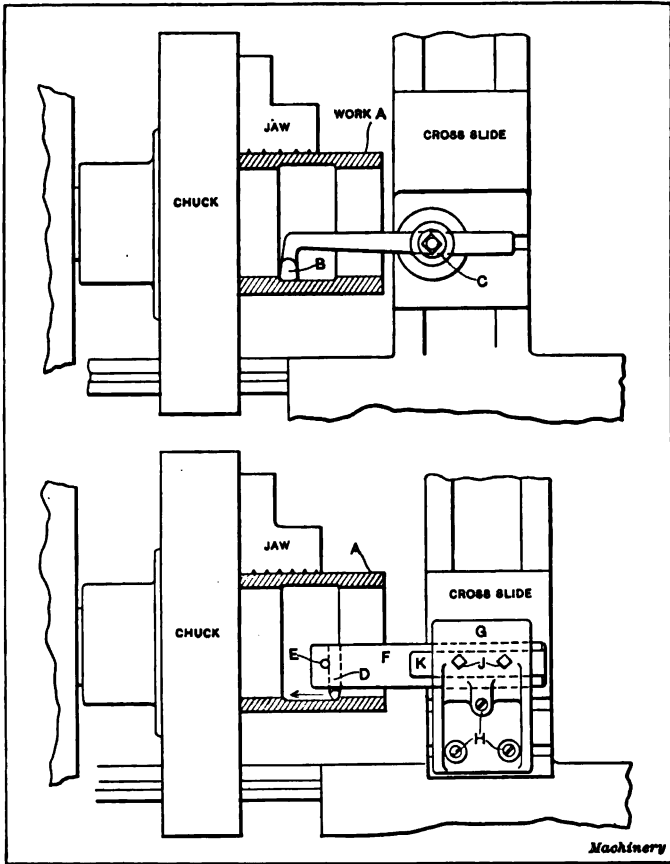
Two Simple Types of Recessing Tools for the Engine Lathe
